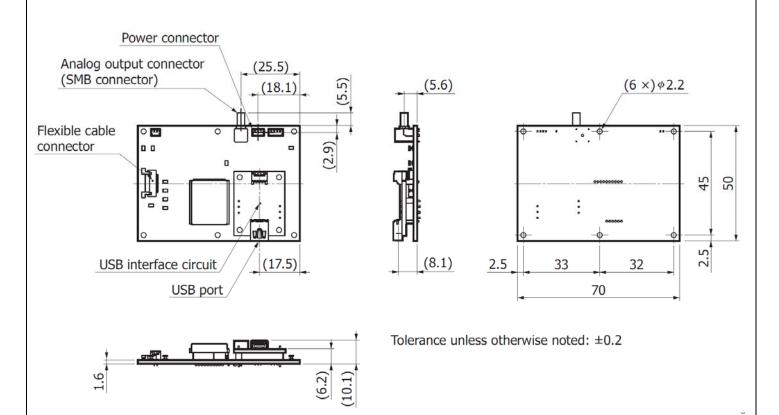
Power supply board dimensional outline (Unit: mm)
